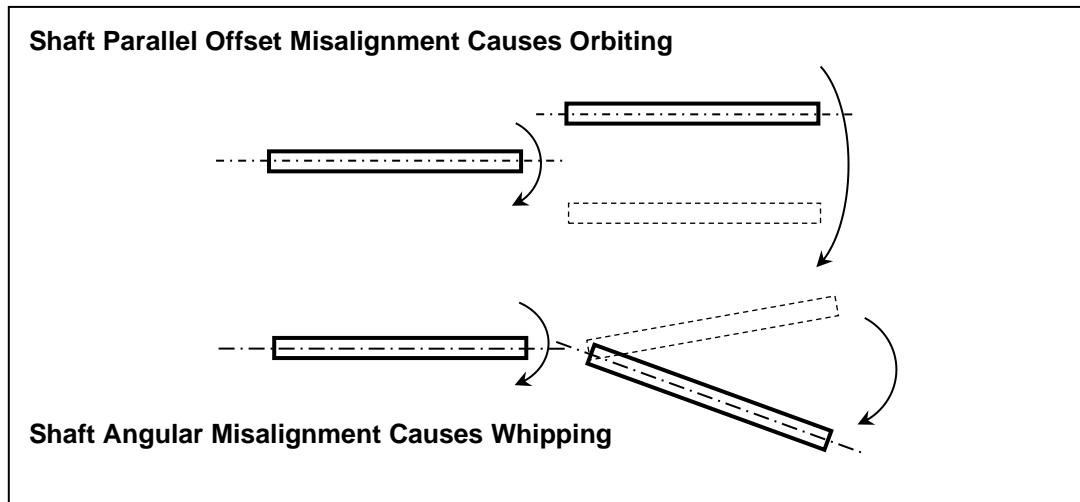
Inaccurately Aligned Shafts Destroy Machinery
